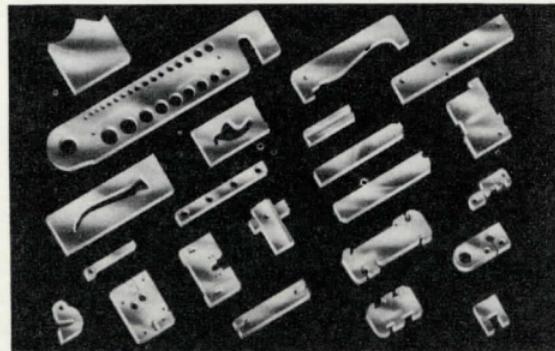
Some of the tools, gages, parts and pieces readily made with Starrett Precision Ground Flat Stock.
